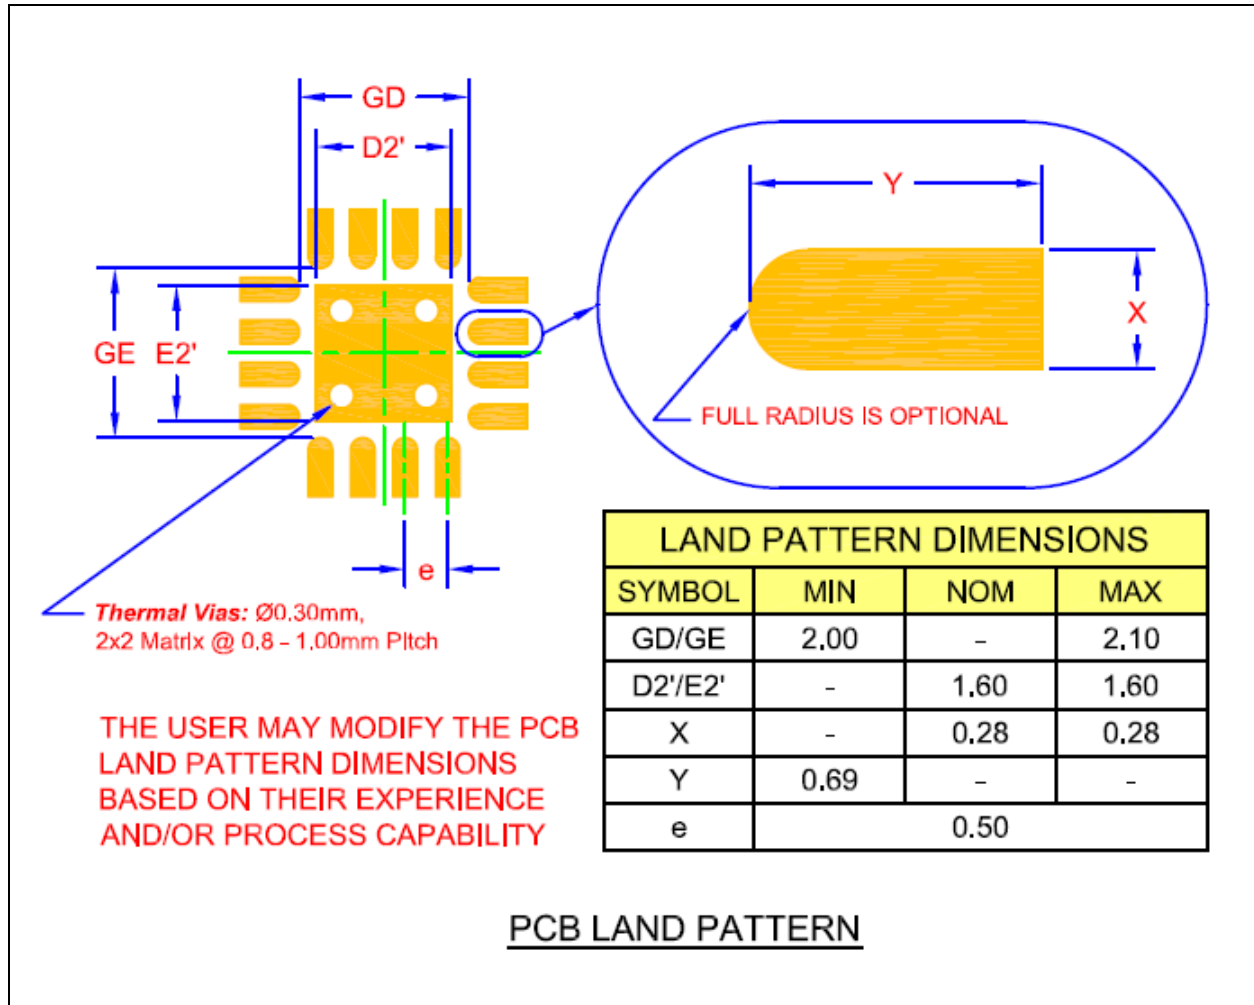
CAP1208 PCB Land Pattern and Stencil - 16-Pin QFN 3mm x 3mm
